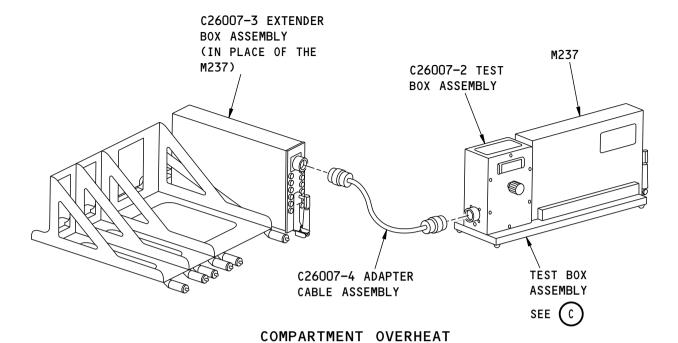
/26-18-00-990-804 (Sheet 1 of 2)
